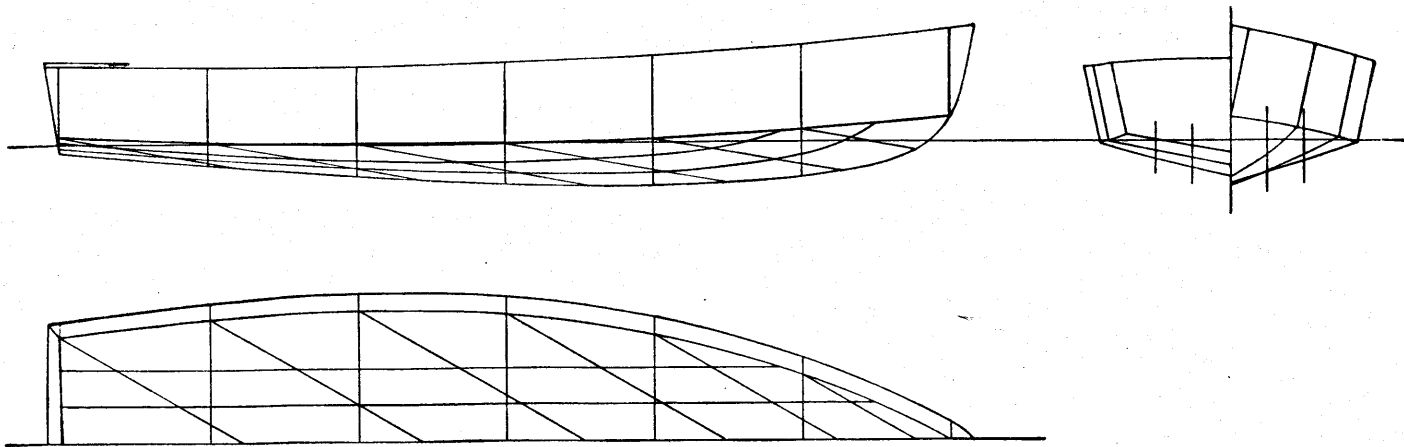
Layout of a design with a "cylindrical" bottom surface, showing the parallel positions of the generatrix
